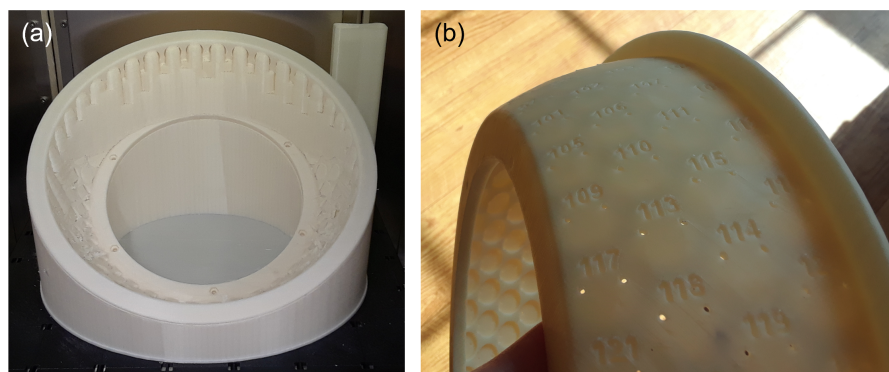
(a) Array printed in a single piece. (b) Close-up of the printed array numbering.
